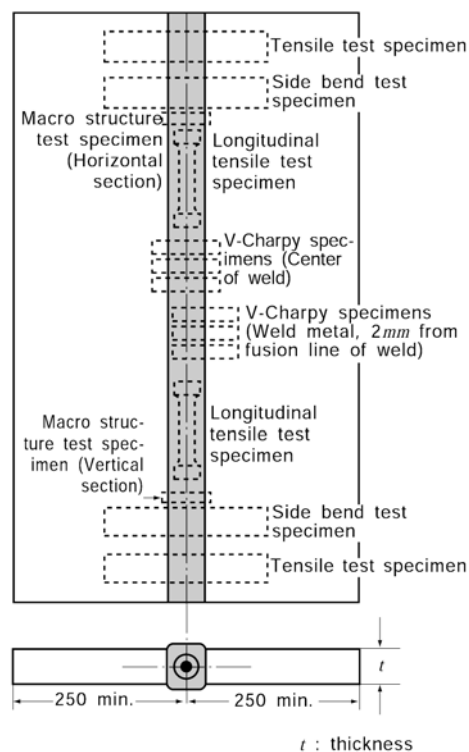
Butt Weld Assembly (Electro-slag and electrode-gas welding, Unit :mm)
